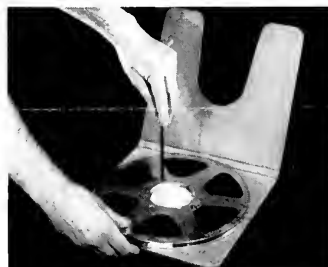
FIG. E. — Inner section of box turned over, with the other reel flange being screwed in place.
